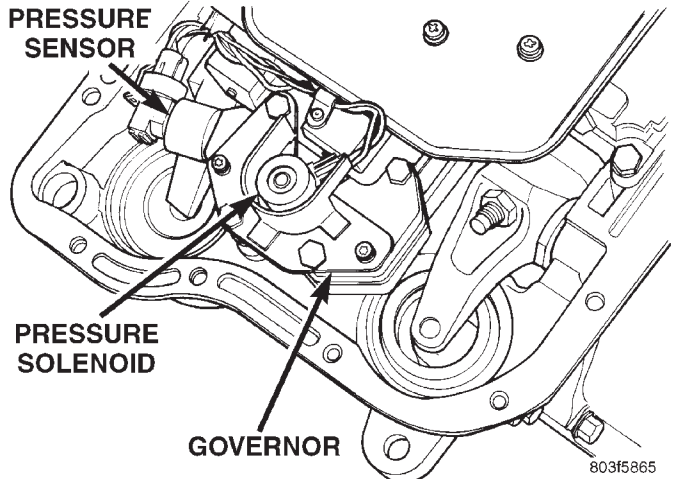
Governor Pressure Solenoid And Sensor Wire Locations
